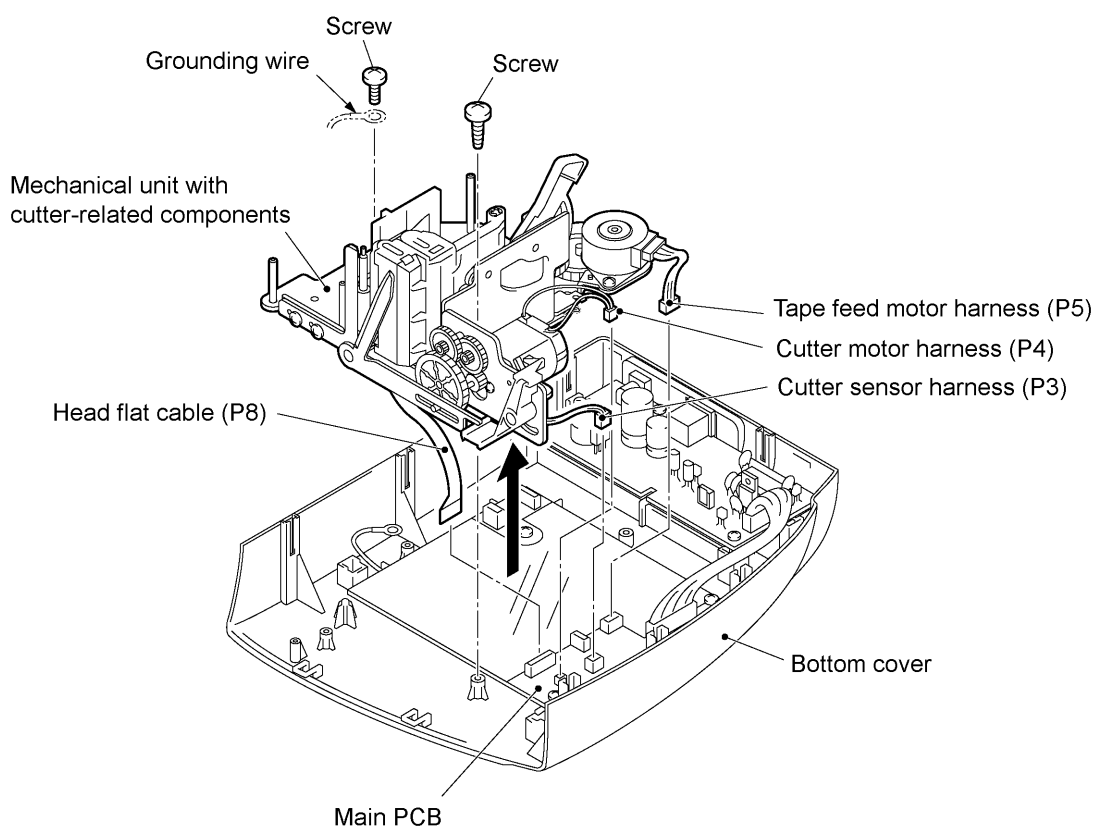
Removing the Mechanical Unit Together with Cutter-related Components
